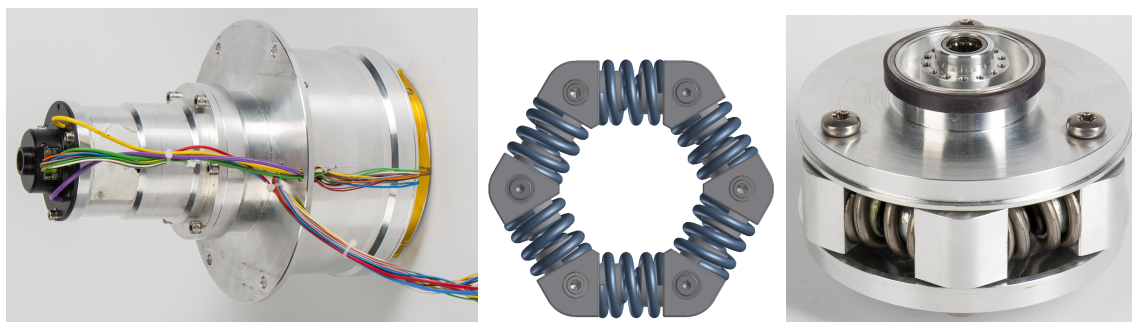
(left): Assembled 50 Nm Actuator, (middle, right): Details of the elastic element (coil springs).
